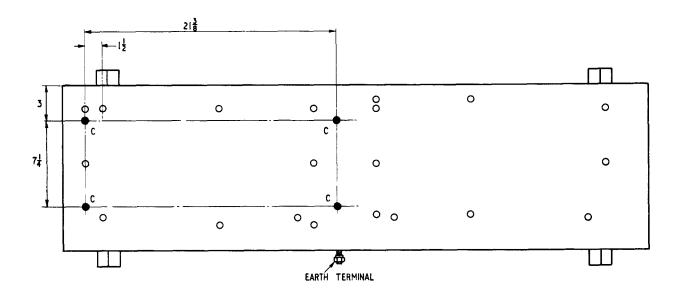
PLAN OF 50-IN. TABLE SHOWING DRILLING FOR C12
